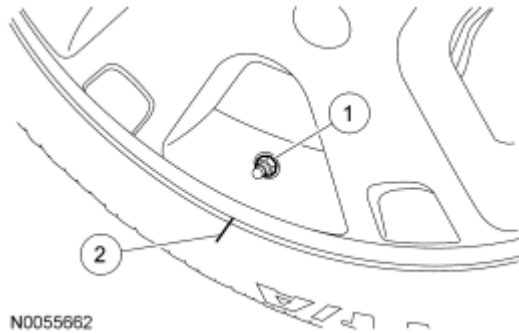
Locating Mark On Tire Side Wall At Valve Stem Position
